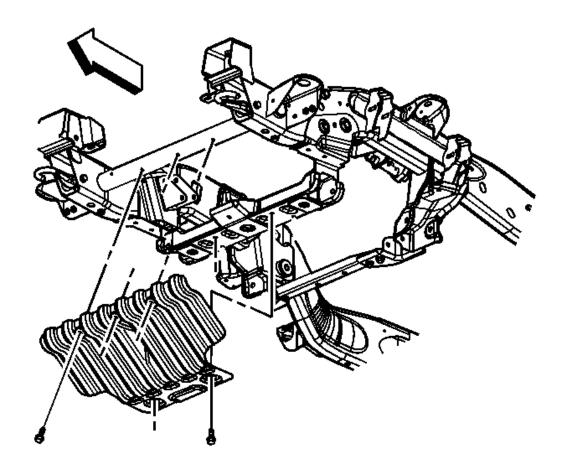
View Of Engine Shield & Bolts Courtesy of GENERAL MOTORS CORP.
